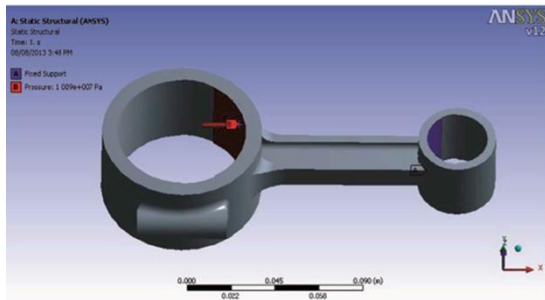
Compressive Load at Crank End for Aluminum 7068 Alloy
